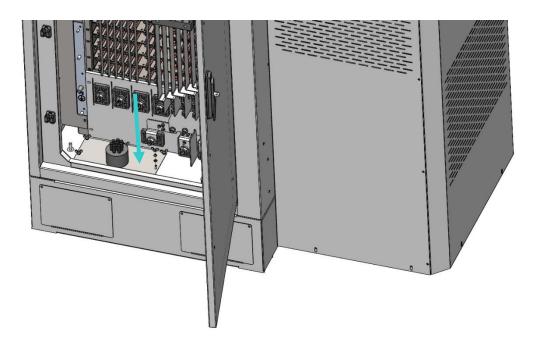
Placement of Removable Plate inside bottom of charger (optional Cable Gland not shown)
